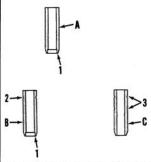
Valve guide (A) Incorporates a gas cut (1) and is used on both intake and exhaust valves in 1GM engine. Valve guide (B), with gas cut (1) and single groove (2), is used for exhaust valves in all models except 1GM. Valve guide (C), without gas cut and with two grooves (3), is used for Intake valves on all models except 1GM.
